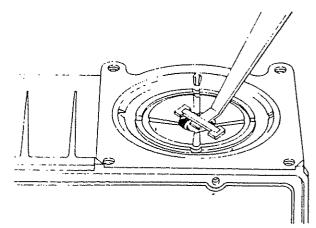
CHECKING PUMP INTAKE BALL VALVE CLEARANCE
